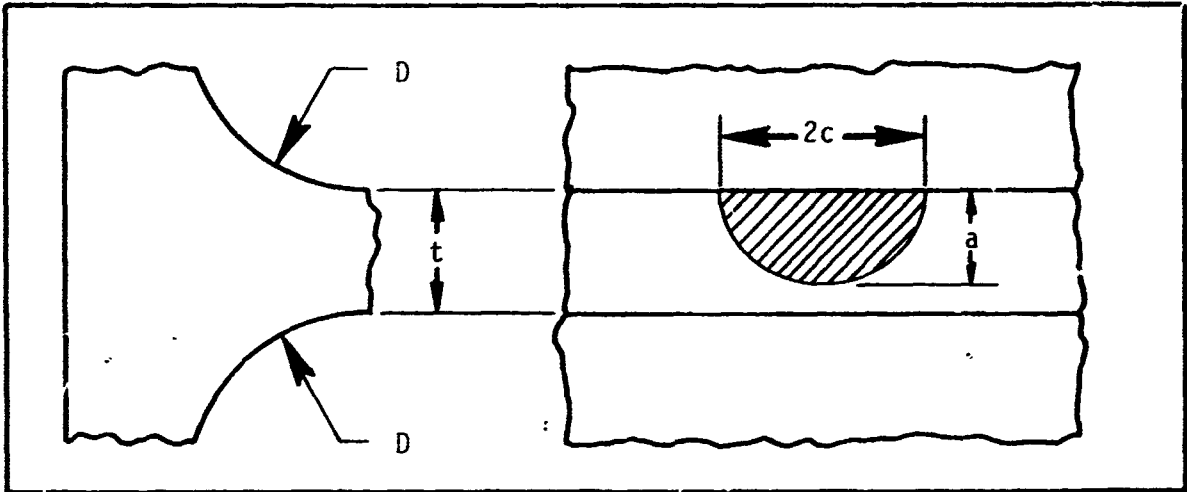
Actuator Cylinder Geometry and Fracture Description for Case I
